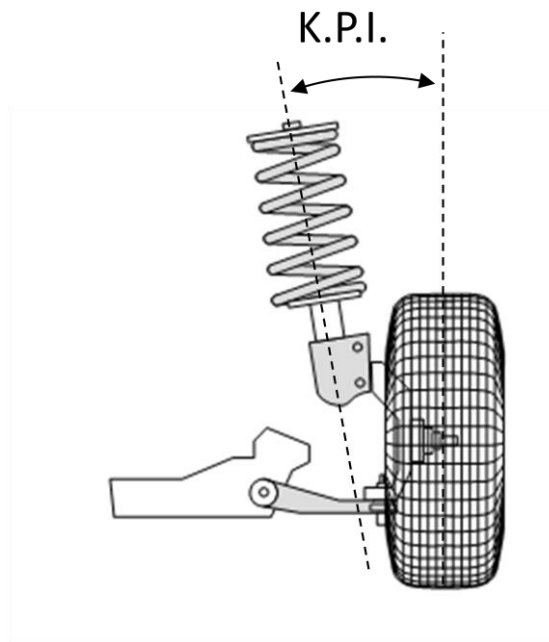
Front view of a tire and measurement of the kingpin incline angle
